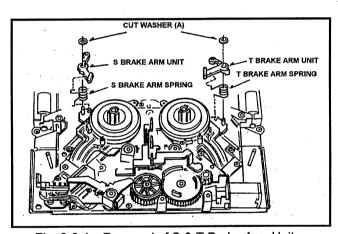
Removal of S & T Brake Arm Unit
